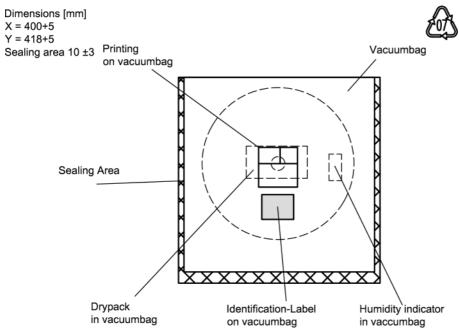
Drawing of moisture barrier bag (MBB) for reel with diameter of 330 mm.
